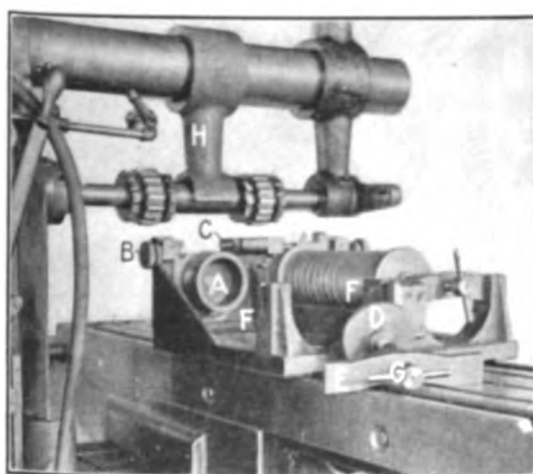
MILLING DRIVING EARS OF SLEEVE
